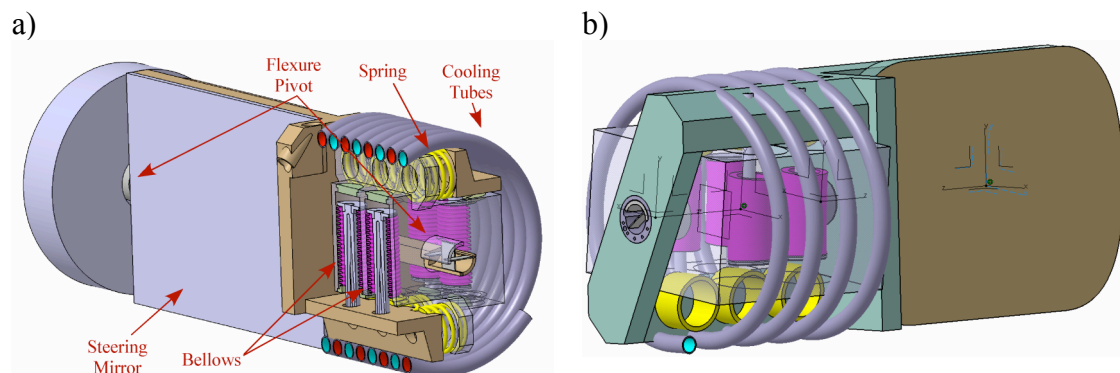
a) The ‘balanced’ and b) ‘cantilevered’ steering mechanism designs.
